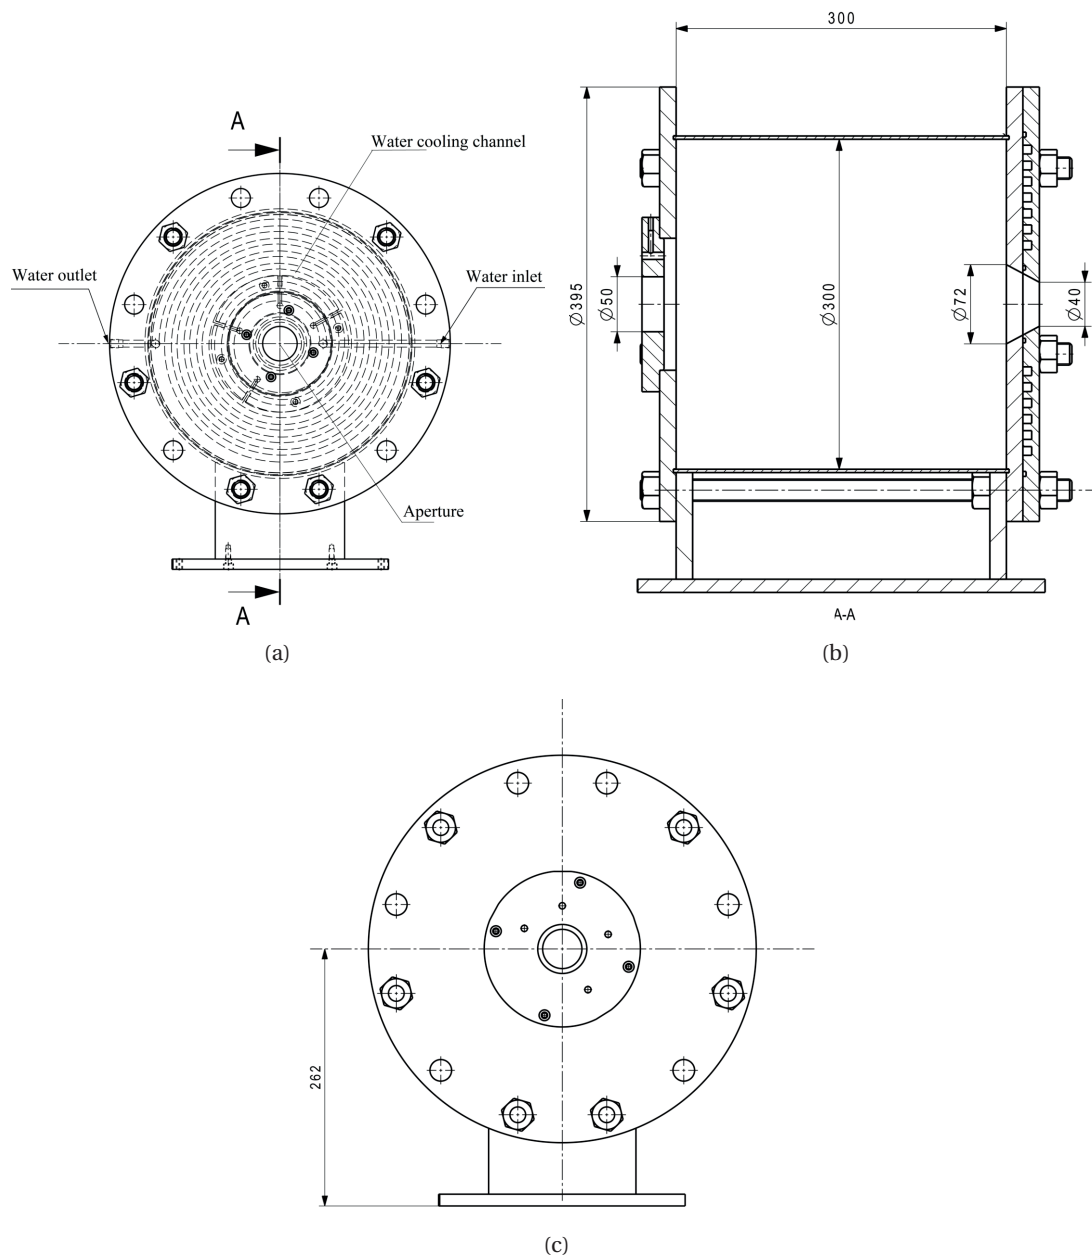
Technical drawings for the reactor steel frame: (a) the front view showing the water-cooled front and reactor aperture, (b) side view for A-A, and (c) back view of the reactor.
